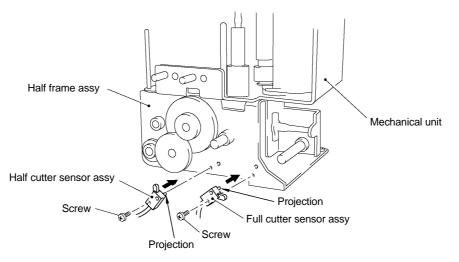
Reassembly of the Half Cutter Sensor Assy and the Full Cutter Sensor Assy
